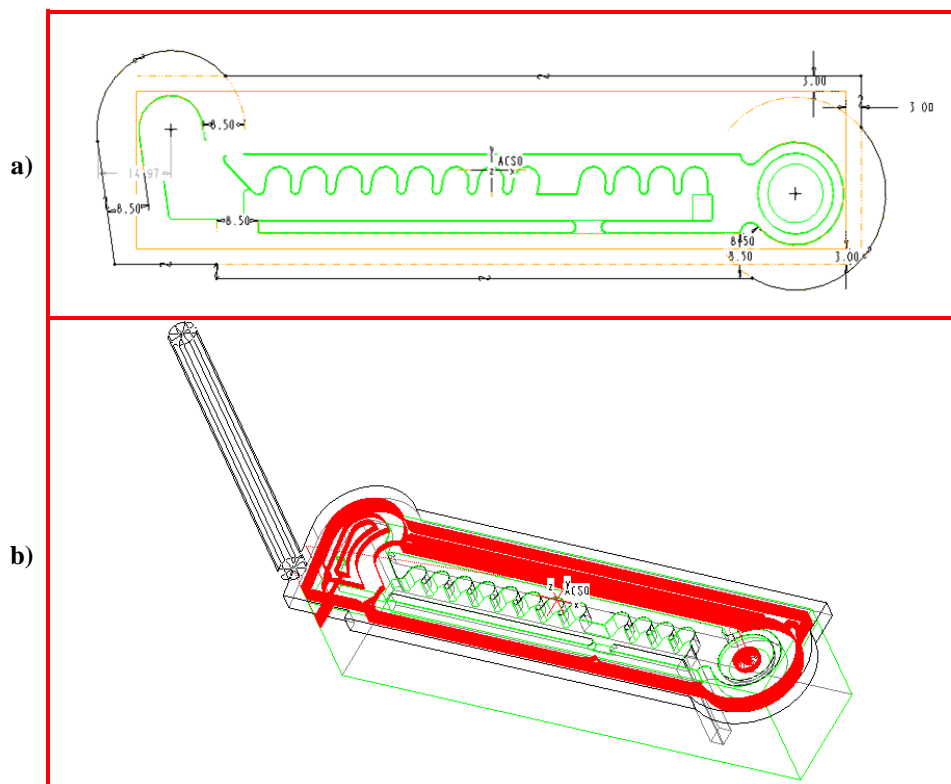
The simulation of pre-machining of the workpiece: a – the setting of the amount of removed material; b – the trajectory of the cutting tool for the first machining step.
